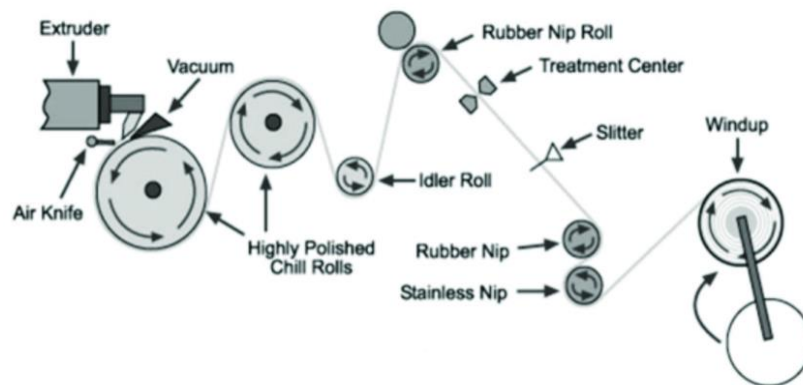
Schematic view of a cast film extrusion line. (12)
